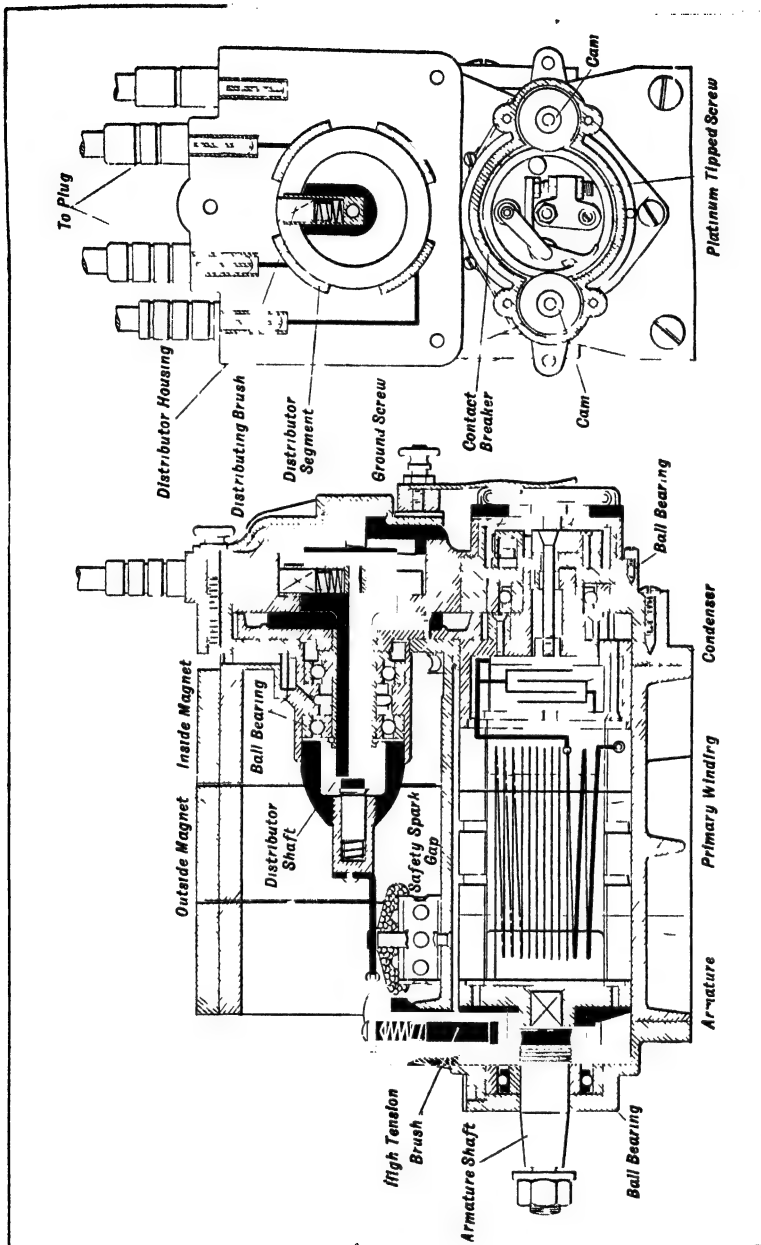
Side Sectional View of Early Bosch Automobile Type, High-Tension Magneto, Showing Disposition of Parts. End Elevation Depicts Arrangement of Distributor and Interruptor Mechanism.
